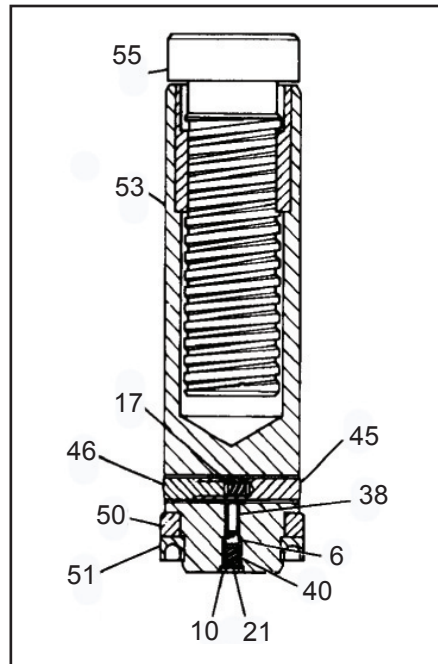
Parts Illustration for Model HW93731 -Ram Assembly
